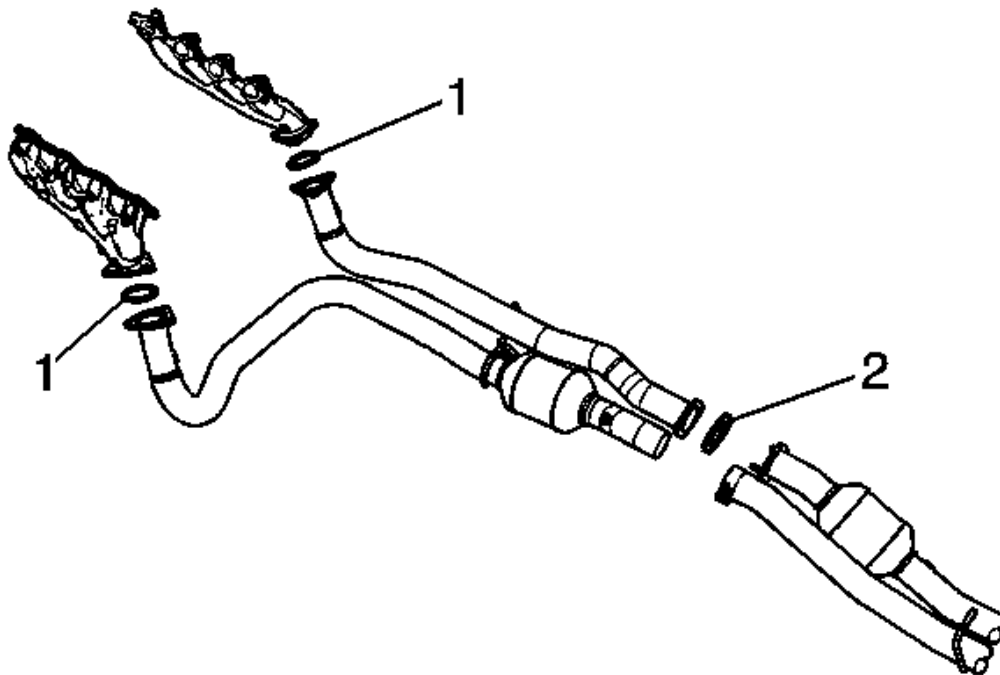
Identifying Appropriate Exhaust Seals & Gaskets
